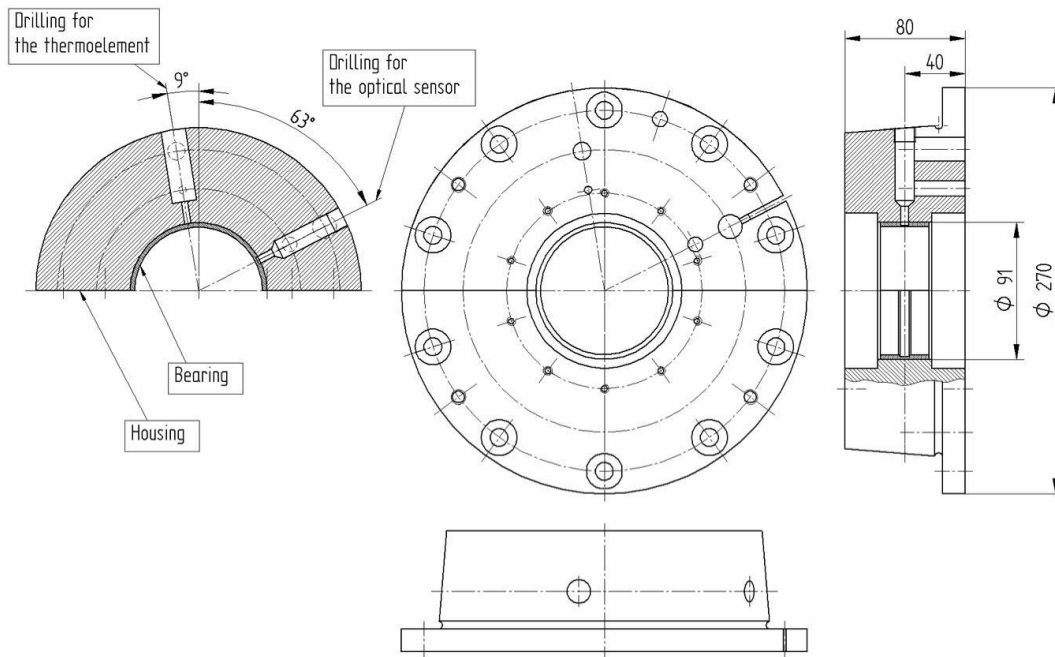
Bearing housing with the bearing and drillings for the optical sensor and the thermoelement.
